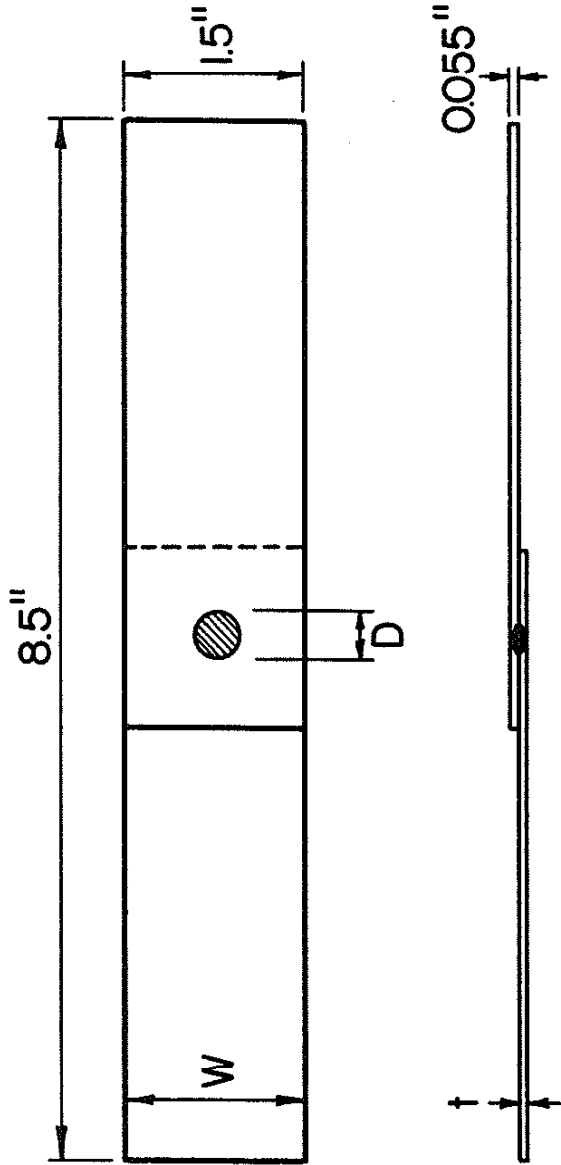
Dimensions of the Tensile-Shear Test Specimen.
